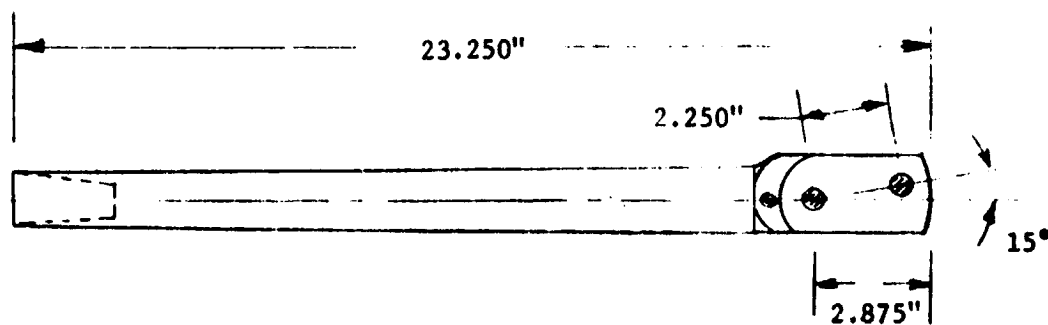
STING HOLDER (MSFC DRAWING 80M51175)
